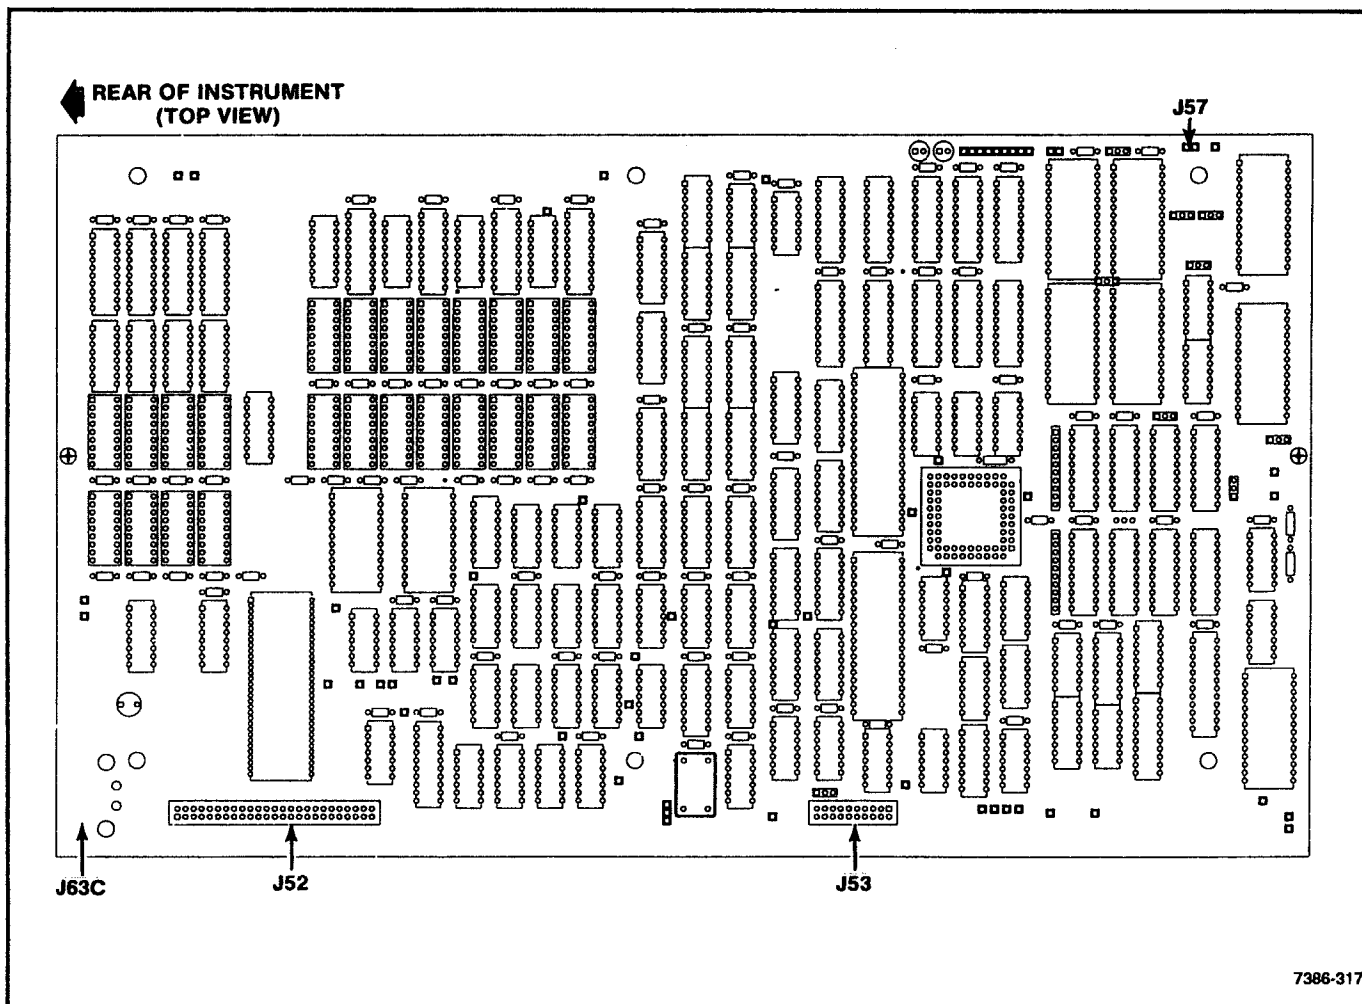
Connector locations for removal of the A7 Display Controller board.
